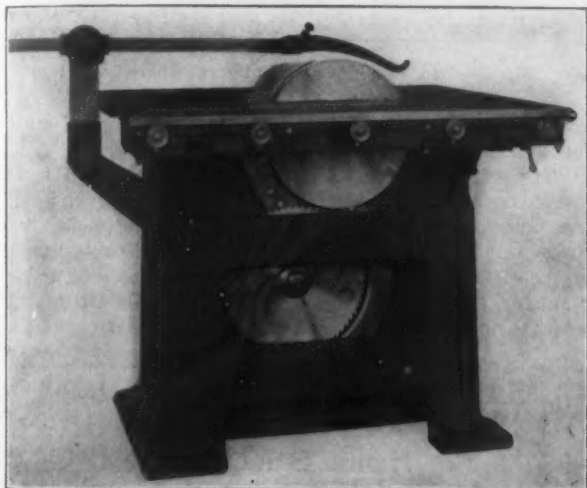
The Improved No. 60 Universal Saw Bench Built by the Oliver Machinery Company, Grand Rapids, Mich.
